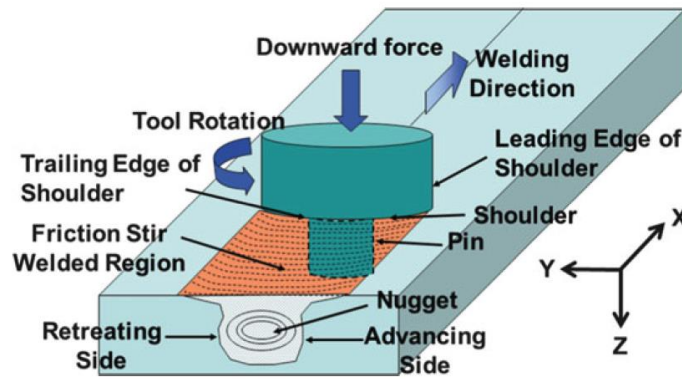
3 Schematic drawing of FSW [38], [39].
